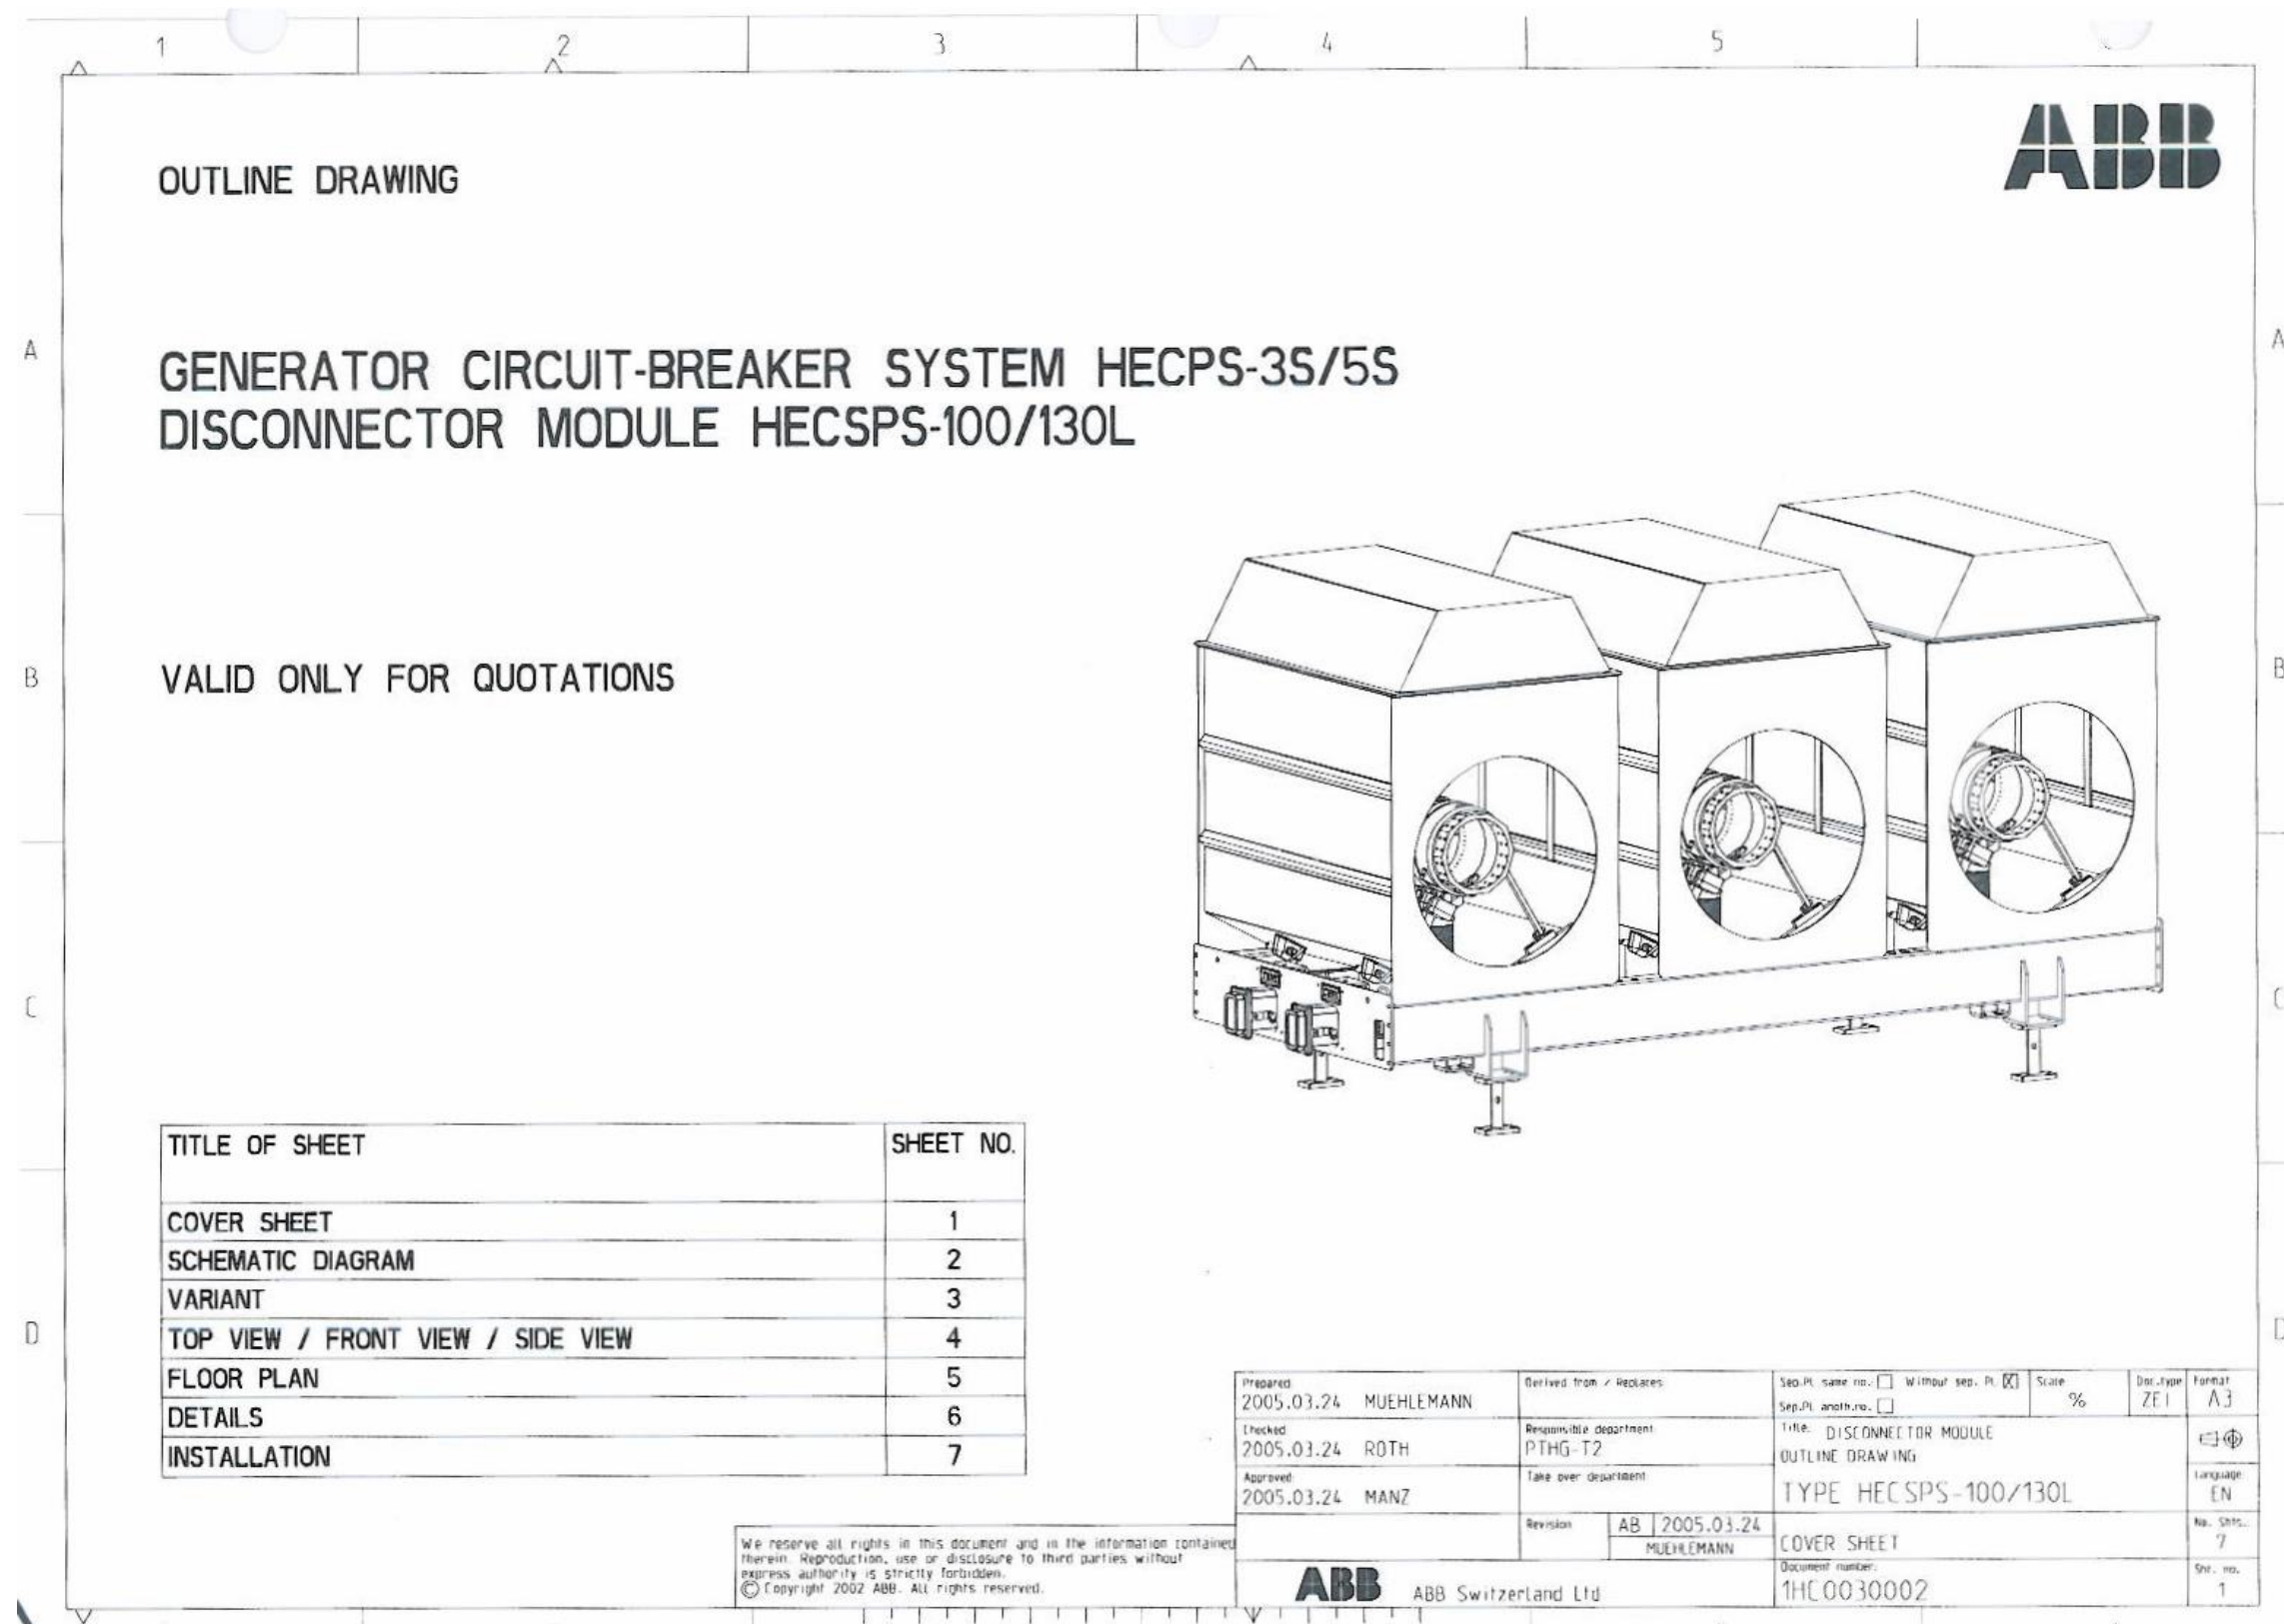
Toshiba Typical Supply ABB Type HECPS-100/130L, Drawing 1HC0030002, Sheet 1 of 7
